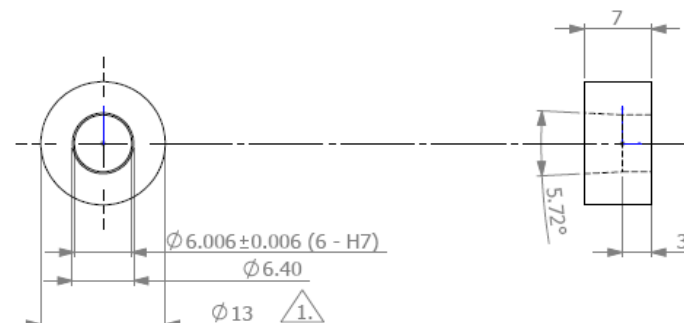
Dimensioned drawing of bone cement washers manufactured to enable consistent crevice geometry conditions
